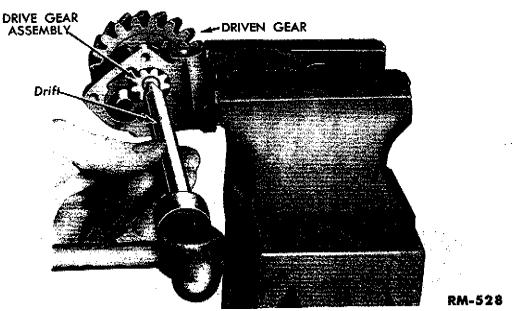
Removing Oil Pump Drive Gear From Driven Gear and Body
